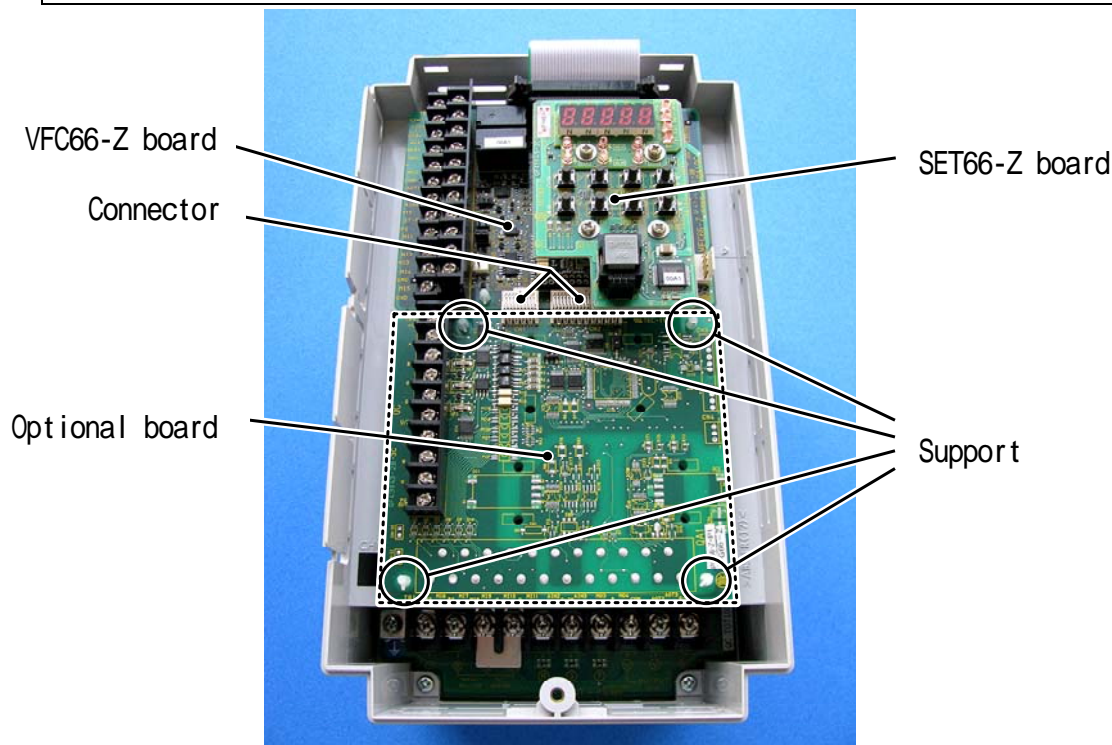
Inverter removed front cover (VF66B-2R222)
